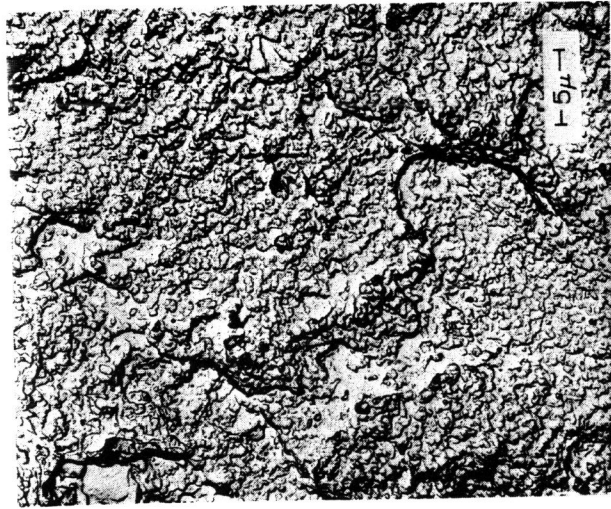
SURFACE TOPOGRAPHY OF BRITTLE FRACTURE IN Al-5.6% Zn (Alloy 7075-T6) FORGING. Small, uniform dimples typical of entire fracture surface of forging which failed in service. No measurable reduction in area was exhibited.
